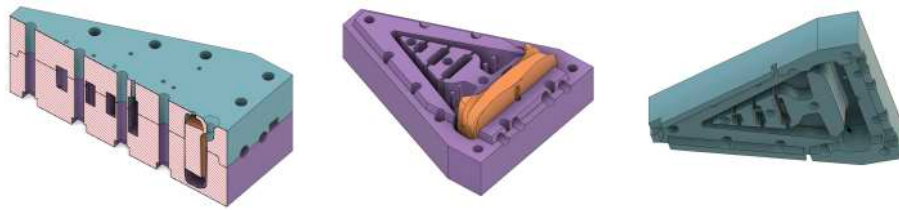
Cross section, bottom and top of the injection mold used to cast the soft caudal tail.
